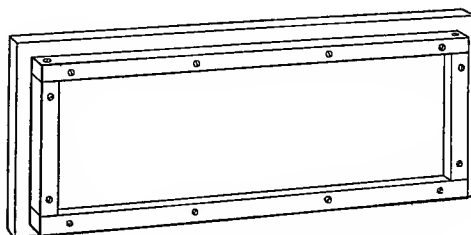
Box Cover, Showing Method of Fastening Strips Underneath
